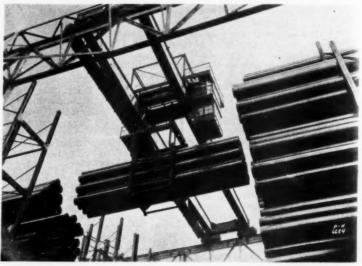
Outdoor crane with 100 ft. span and special load supporting arrangement. The cradle in which the pipes are suspended is a removable section of the storage rack. (Courtesy Pawling & Harnischfeger)
